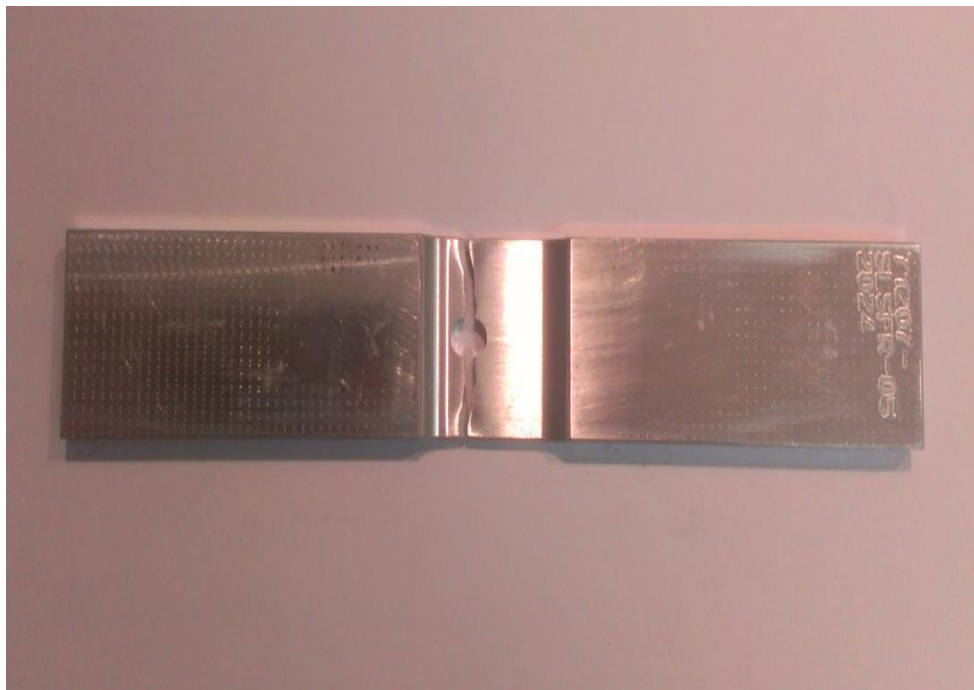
Open Hole in Radius Test Specimen -3 Post-Test Picture
